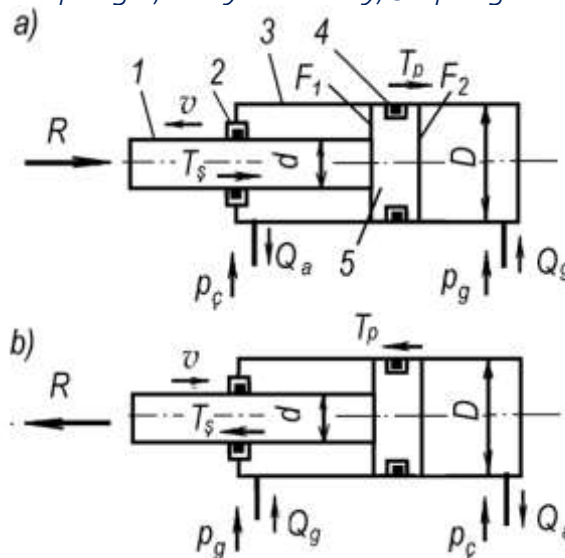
Scheme of forward and reverse movements of a double-acting single-acting rod hydraulic cylinder
